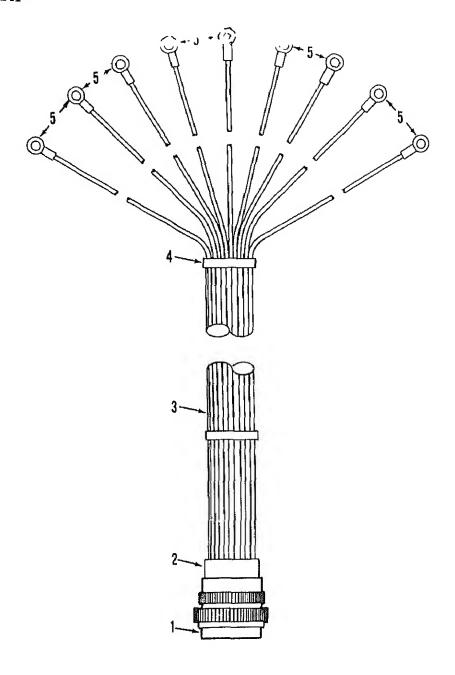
Wiring Harness, 13220E6707 TM5-4120-339-24P/9
